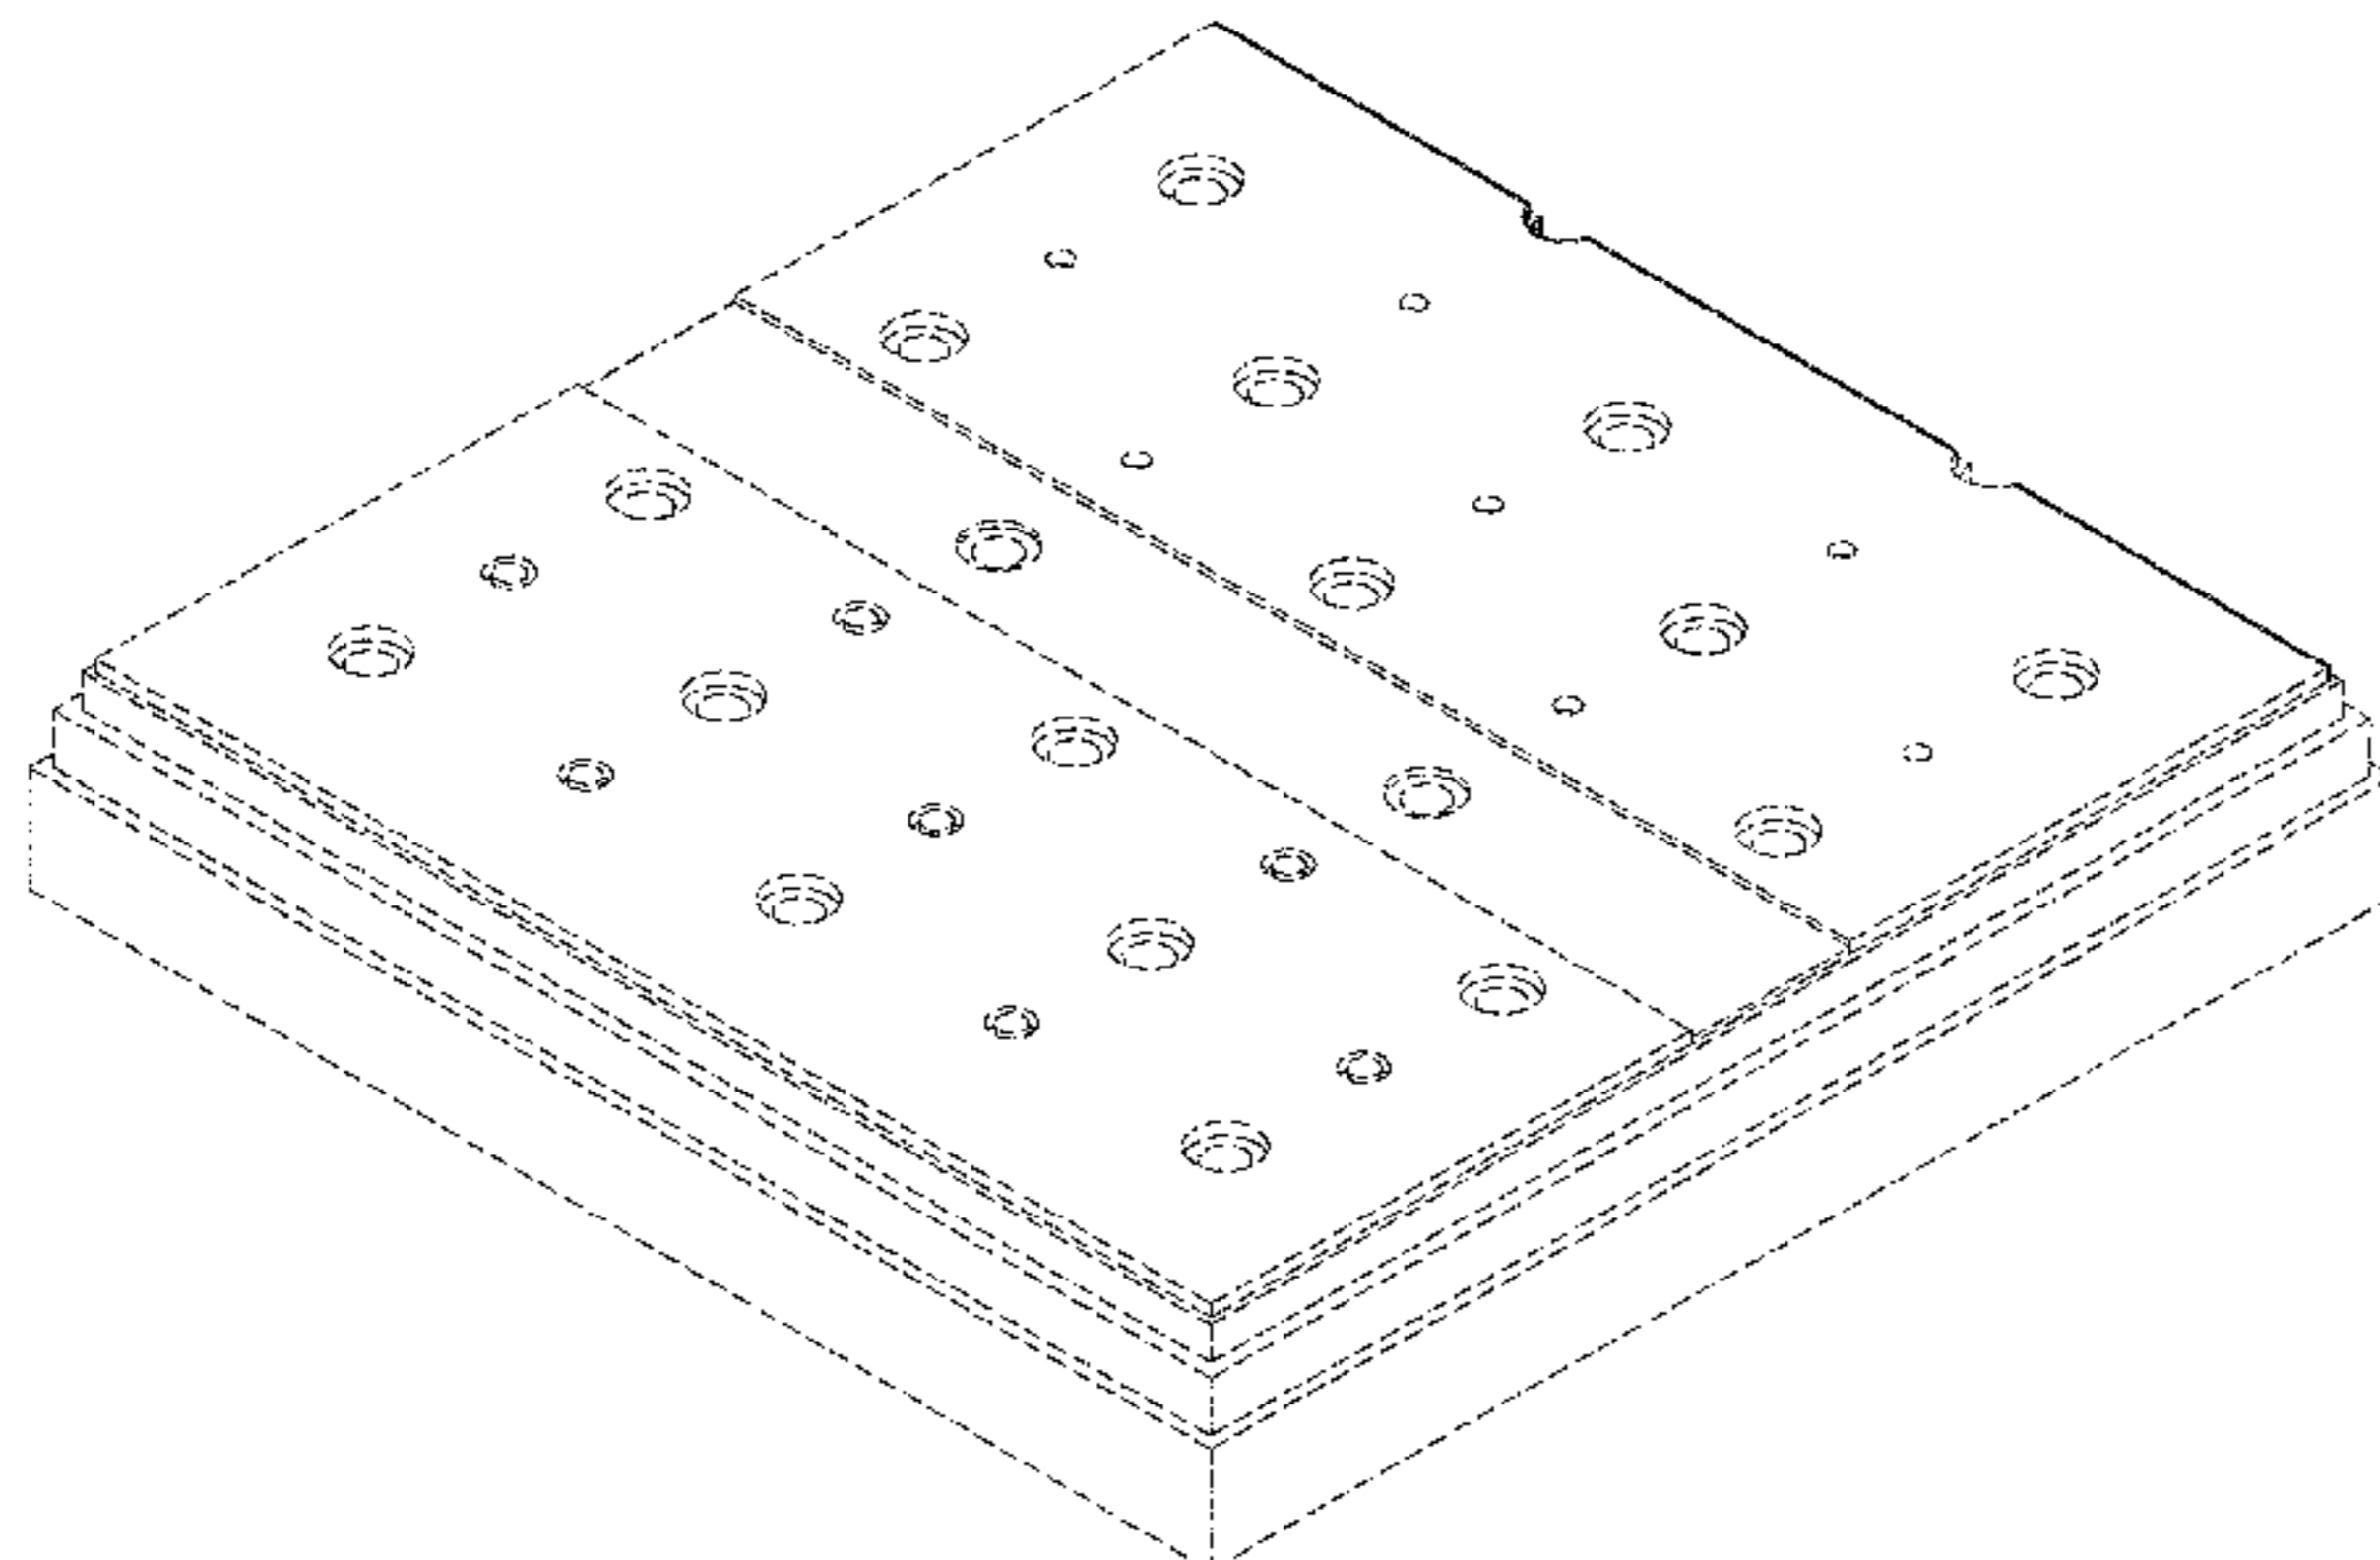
is a perspective view of a light emitting diode chip showing an embodiment of my new design; FIG. 2 is a front view of the embodiment; FIG. 3 is a rear view of the embodiment; FIG. 4 is a left side view of the embodiment; FIG. 5 is a right side view of the embodiment; FIG. 6 is a top view of the embodiment; and, FIG. 7 is a bottom view of the embodiment. The broken line portions of the light emitting diode chip in FIGS. 1-7 represent unclaimed portions of the design and form no part thereof.
